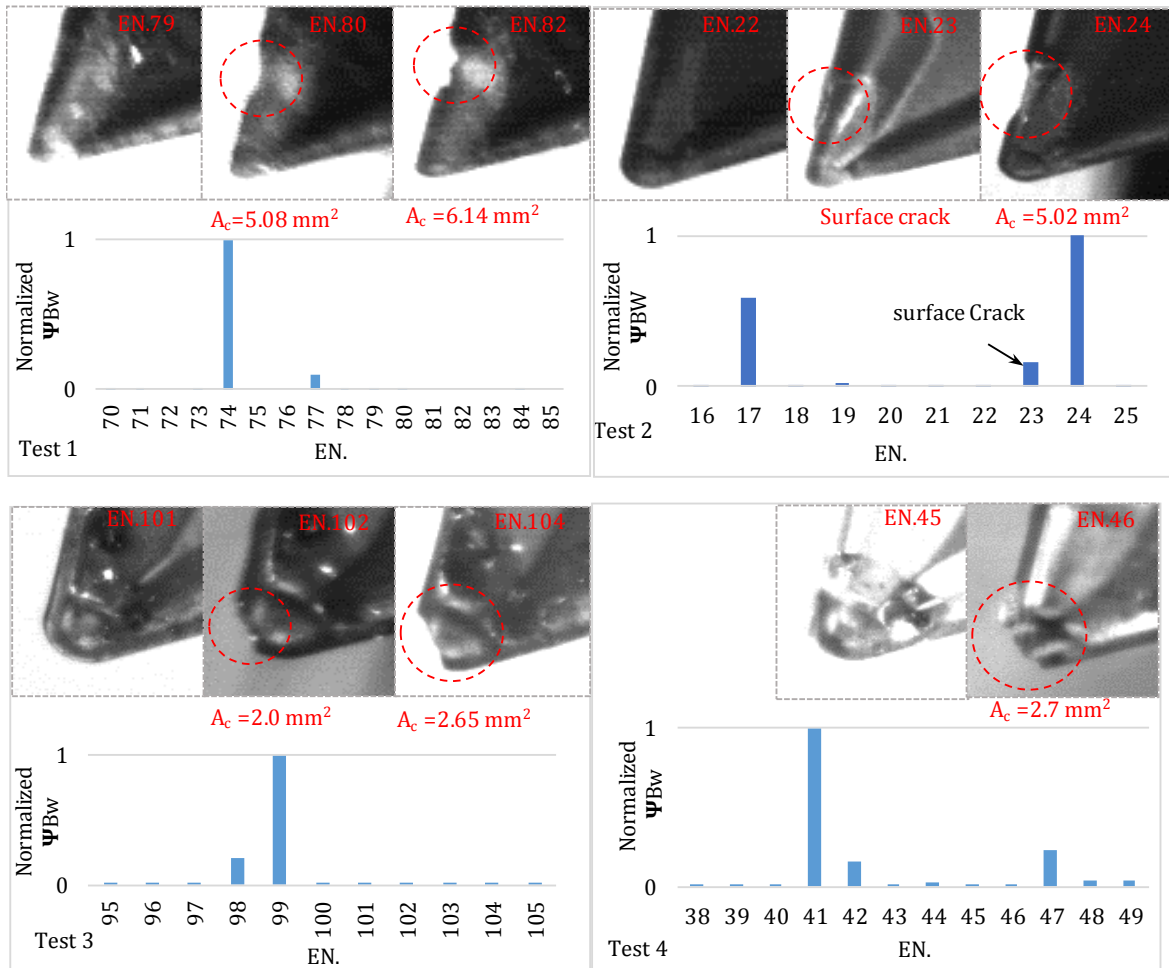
(a) Prefailure detection parameter Ψ_{BW} for turning tests 1 to 4 with respect to the tool/workpiece engagement number EN and the corresponding tool condition and chipping area A_c
